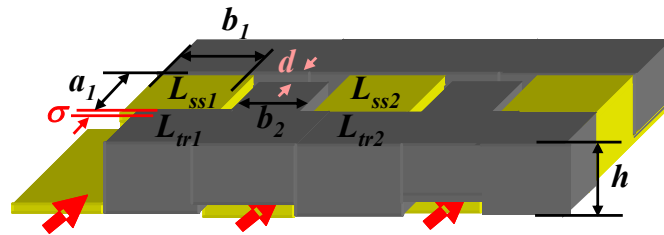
The dimension definition of the three-phase ET-core coupled-inductor
